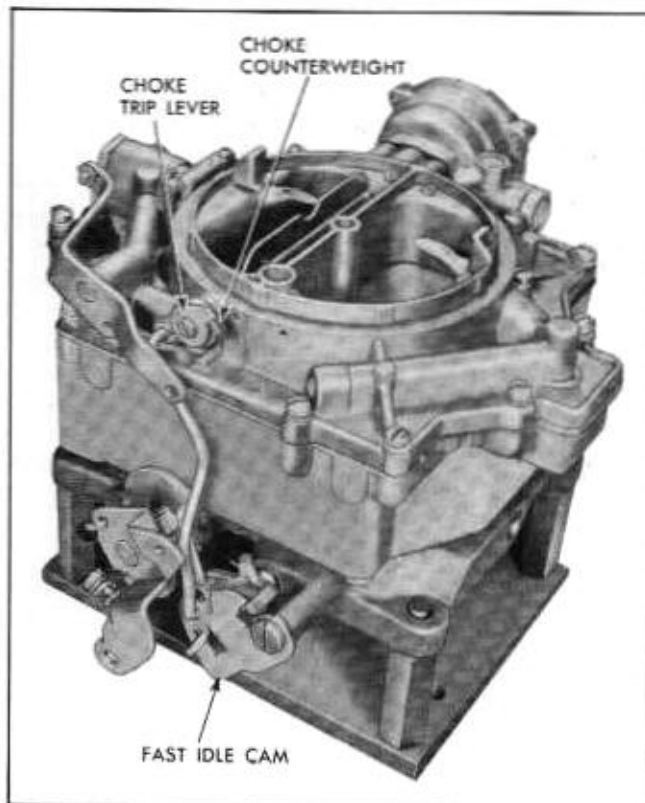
B-98 Counterweight, Trip Level and Fast Idle Cam Installed
